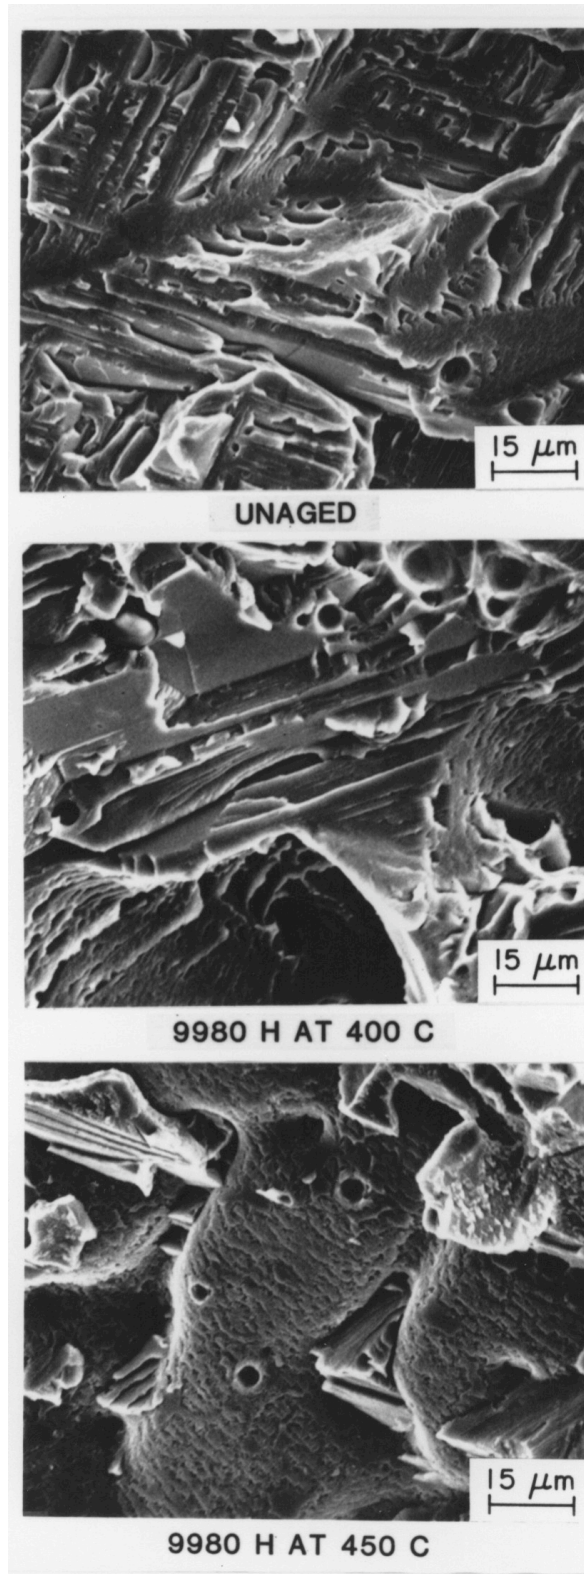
Fracture Surfaces of Impact Test Specimens of Unaged and Aged CF-8 Cast Steel (Heat 60, 21% Ferrite) Tested at -196°C .
